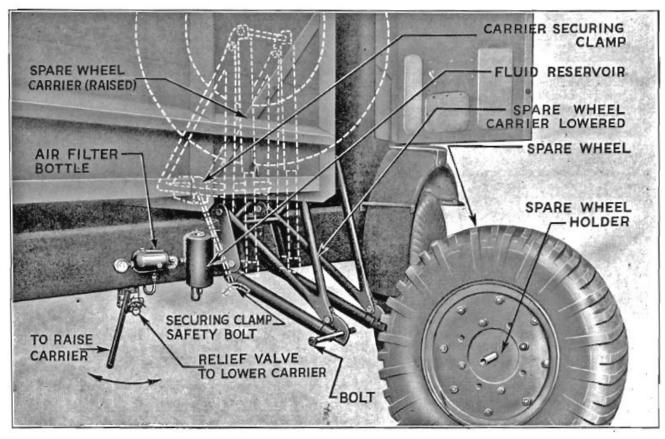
Spare Wheel Carrier Pump and Air Filter Bottle
